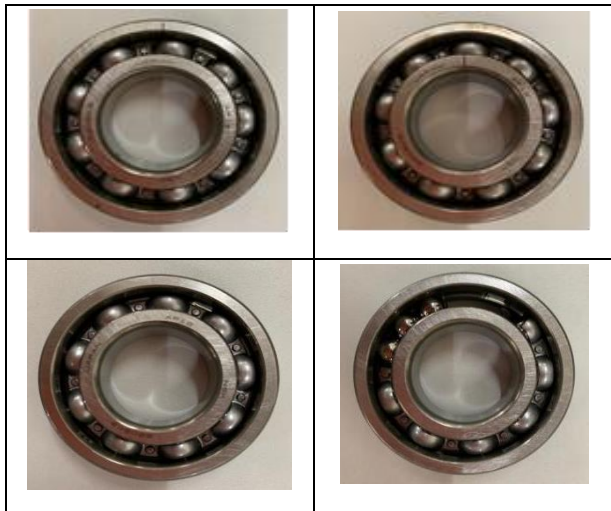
Failure bearing of outer ring (OR), failure bearing of inner ring (IR), failure bearing of rolling body (RB), failure bearing of cage (Cage)
